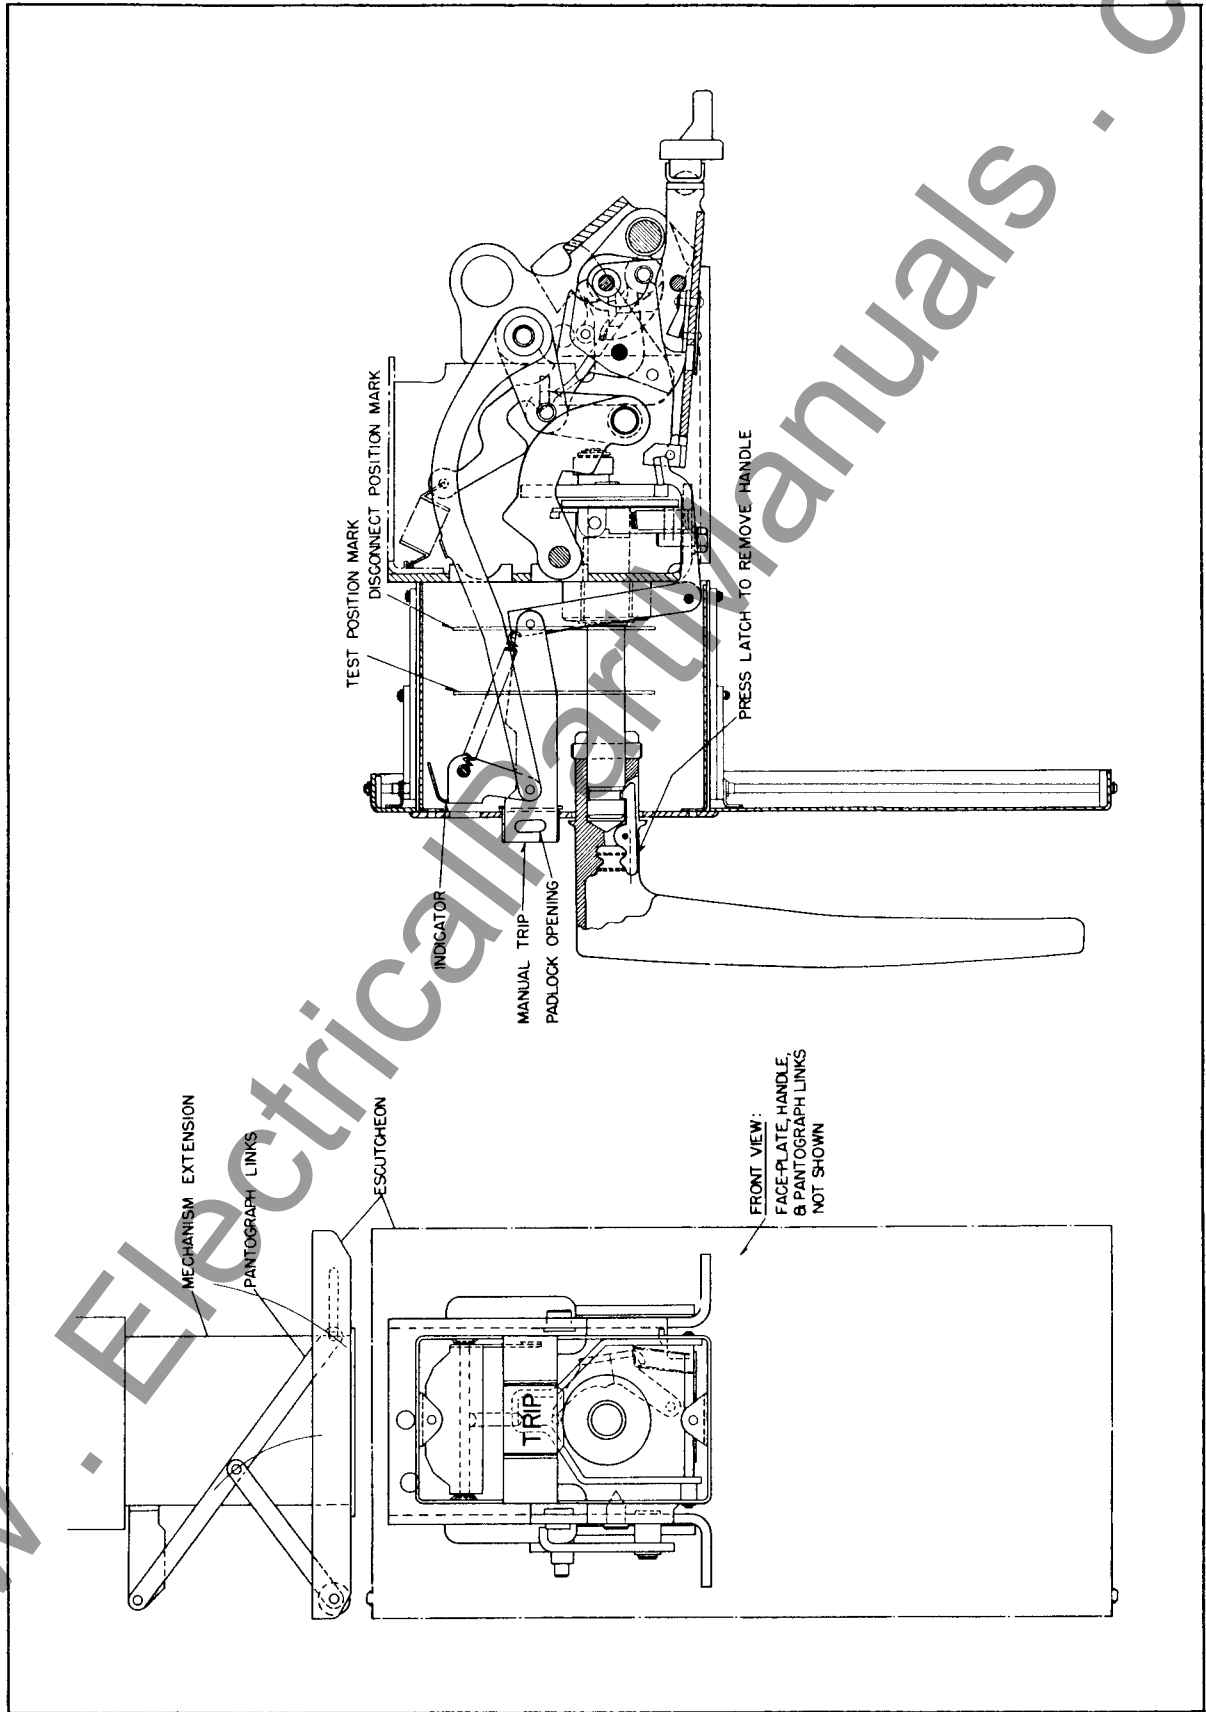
B - Type DB-50 Three Position Operating Mechanism
